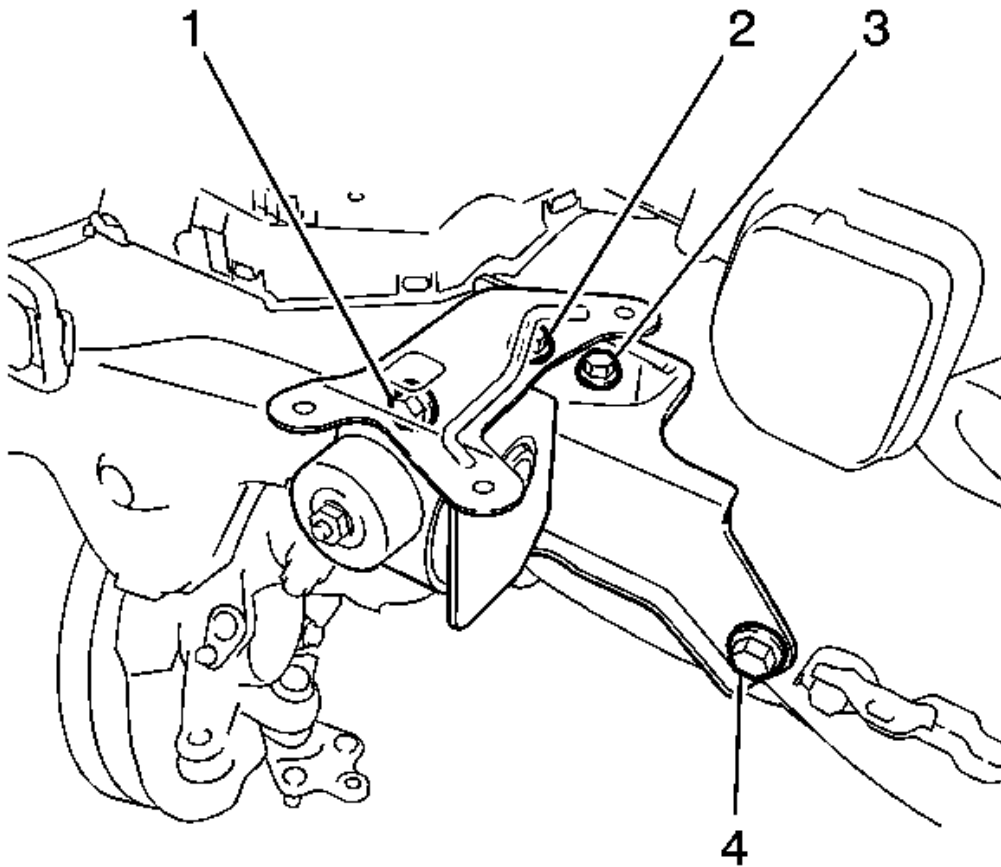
Identifying Left Engine Mounting Insulator & Bolts
